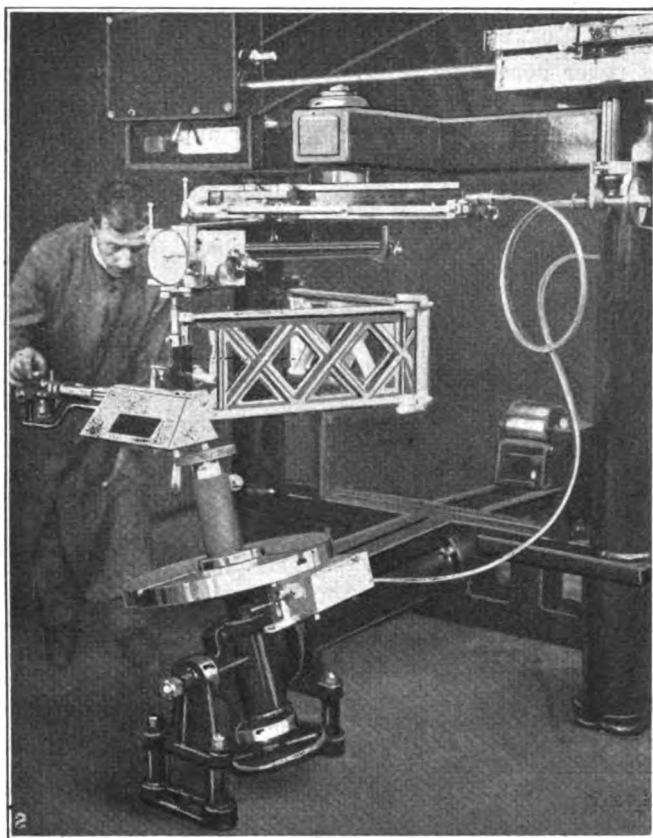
GODFREY JET MACHINE CUTTING ON A PLANE. FIG. 3. GODFREY JET MACHINE CUTTING FROM A TEMPLT
